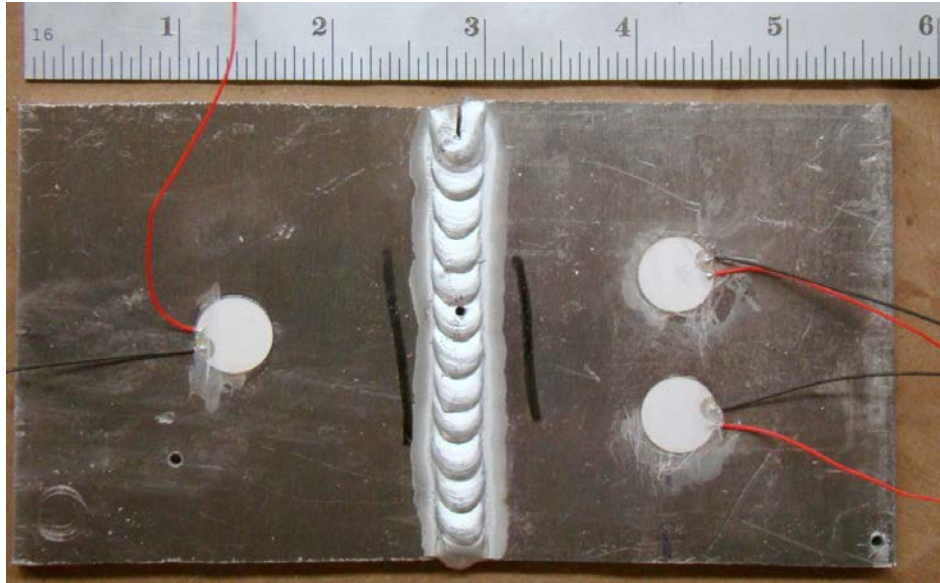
A small plate with a butt weld and three piezo discs is shown.
